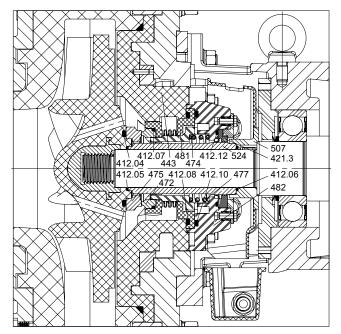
Single-acting mechanical seal with PTFE bellows, version internal flushing and quenching
